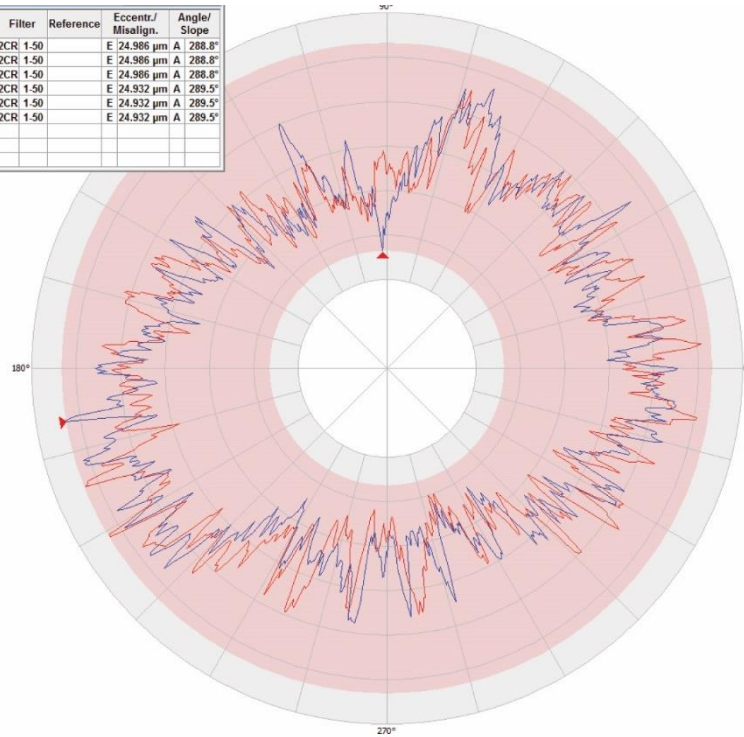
Roundness of Bore with Welded Flanges – Measurement 2
